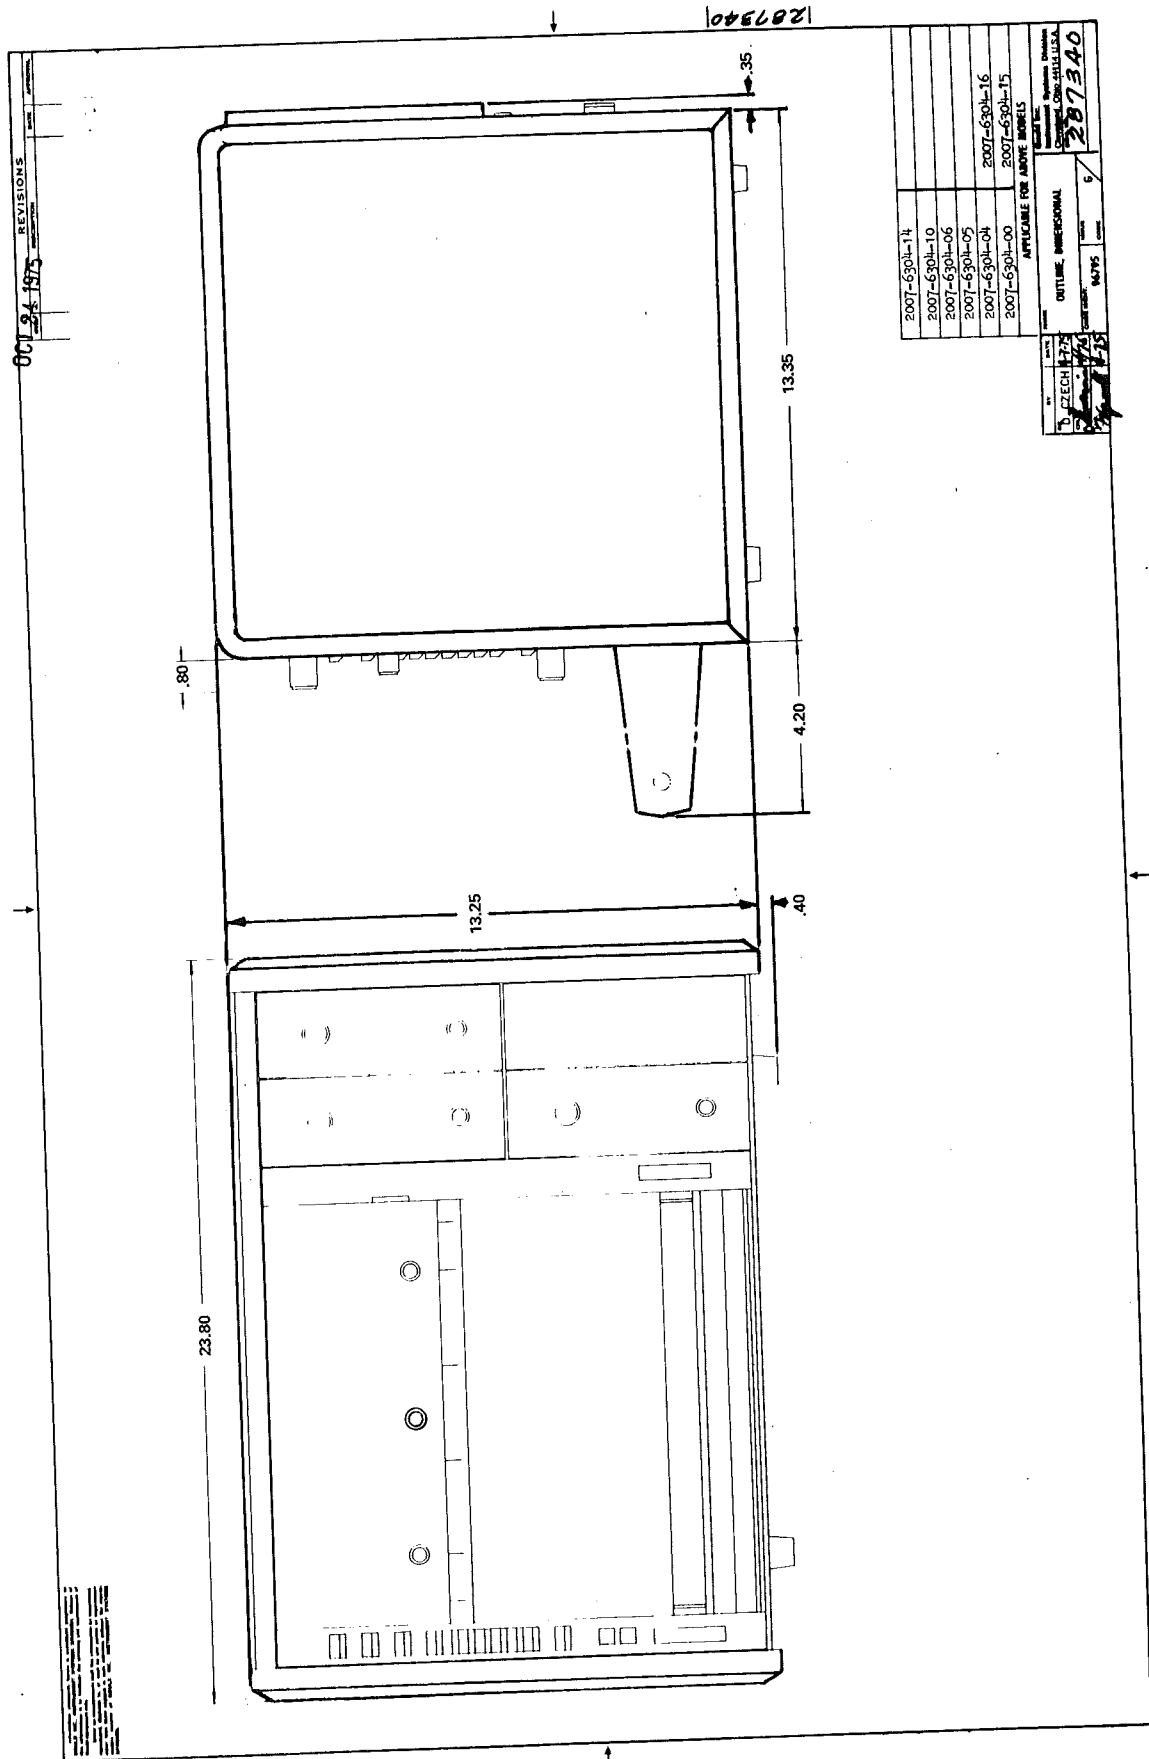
OUTLINE DIMENSIONS - 2600 SERIES WITH 3 PREAMPS
